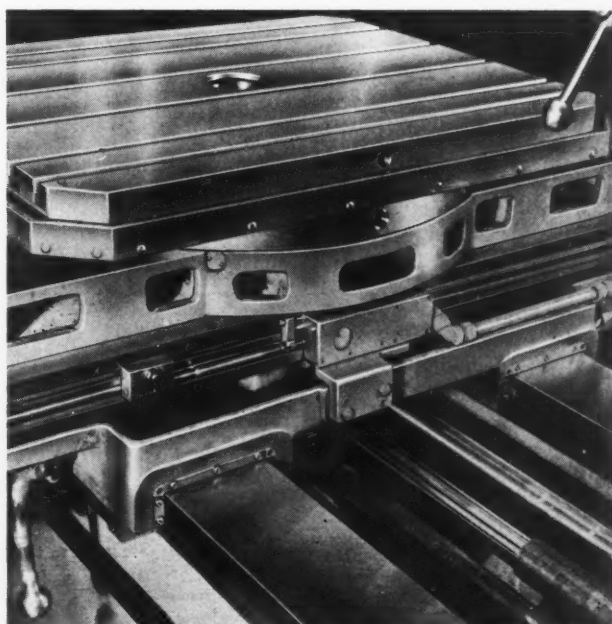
Close-up view showing precision measuring rod in place on table of machine equipped with automatic positioning device
